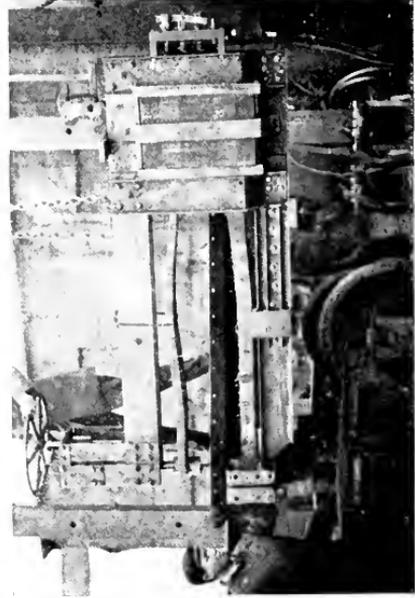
Welder in the Act of Welding the Floor Sheet to the Body Bolster
